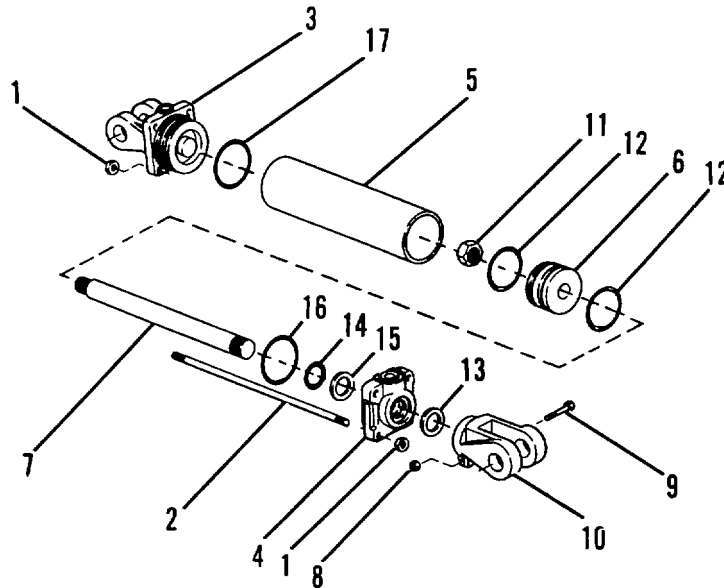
Stabilizer Cylinder Assembly (Sheet 1 of 2) .
